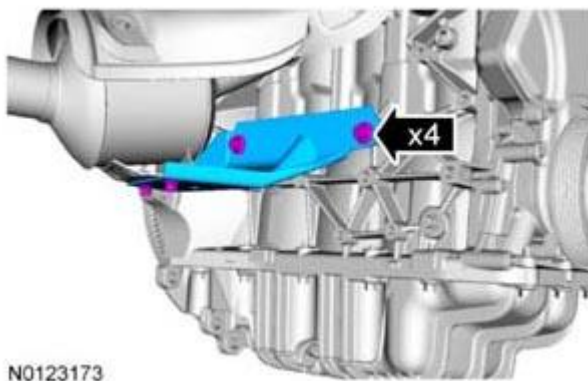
Locating Bolts And Lower Catalytic Converter Bracket
